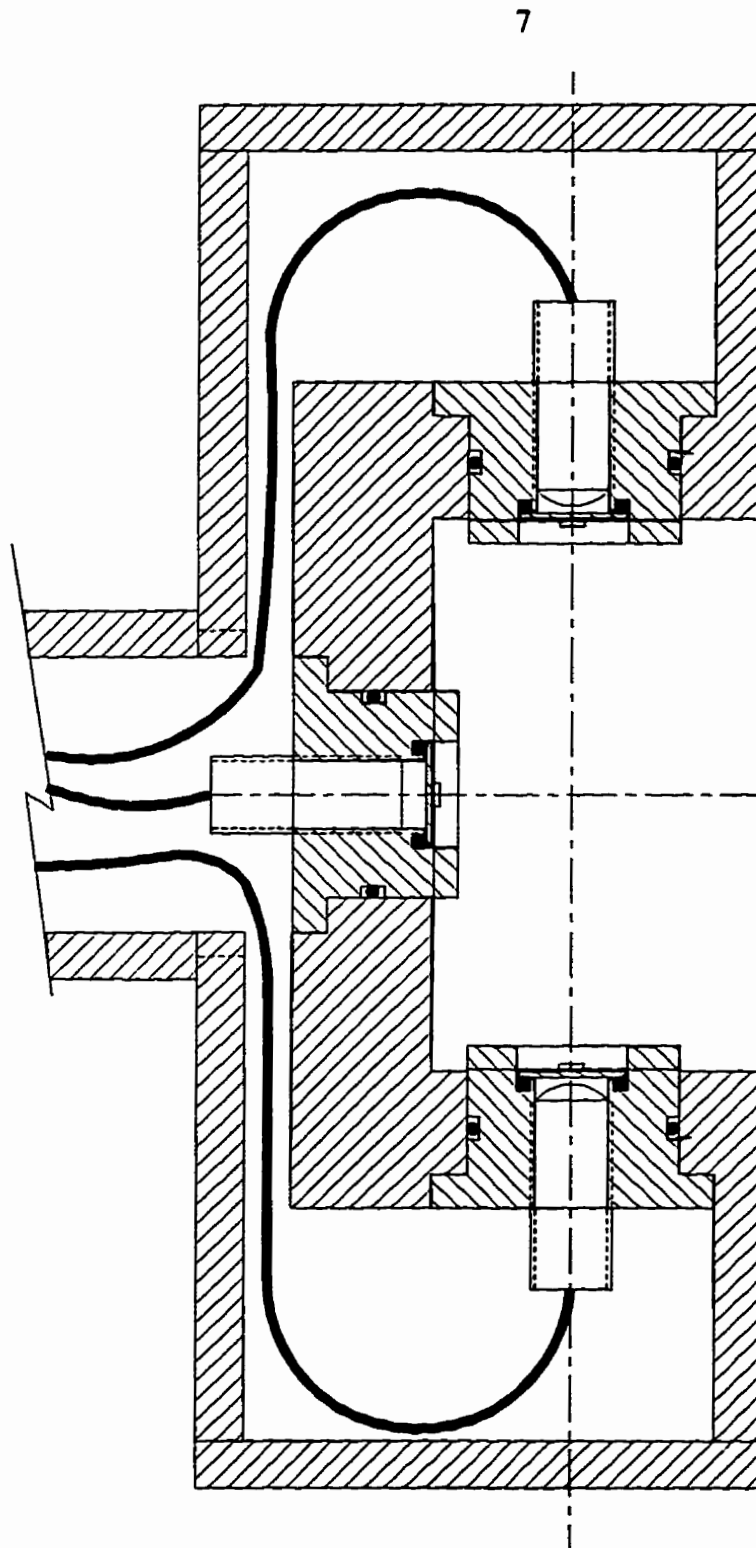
Sectioned View of Sensing Head (showing location of inserts; fluid supply line omitted for clarity)
